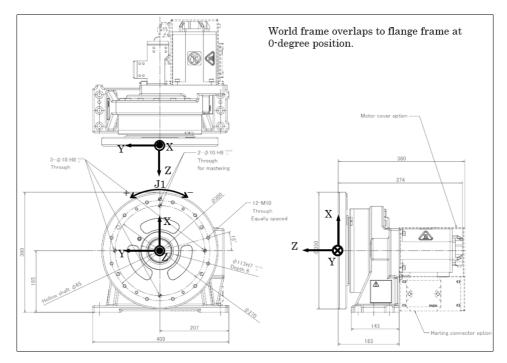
(a) 300kg/500kg payload 1-axis positioner (Hollow type) world frame and flange frame
